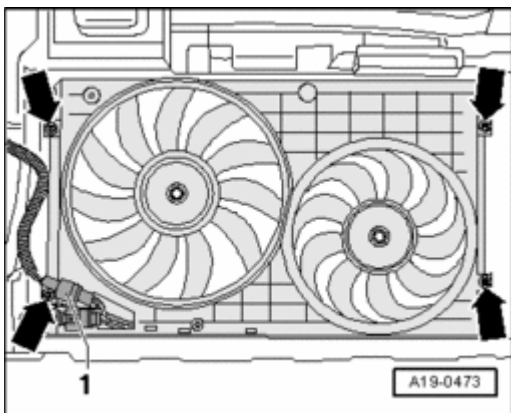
Identifying Harness Connector And Fan Mount Mounting Bolts
